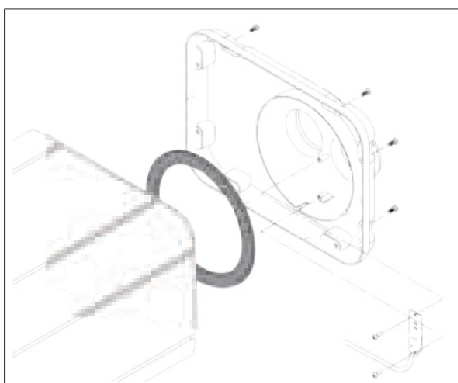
Install metal retaining plate, gasket and housing cover with hot air inlet
